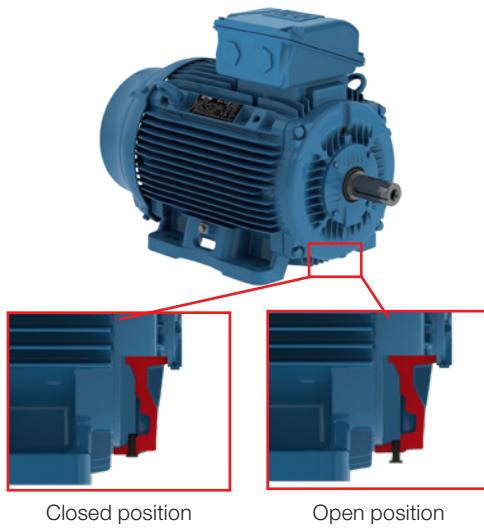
Detail of the rubber drain plug mounted in a closed and open position.
